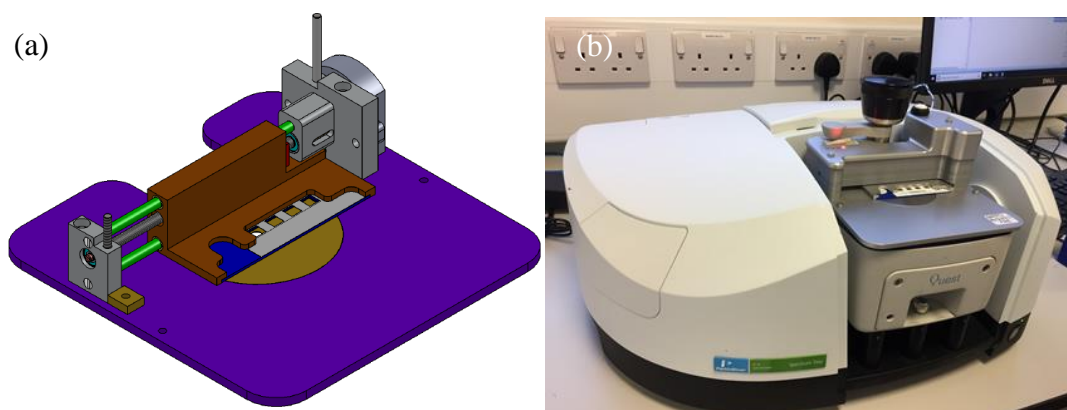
The custom built slide indexing unit intended to be complementary to the Quest ATR universal accessory module (a) as a CAD model showing an assembly of a selection of core components: baseplate (purple), specular reflectance puck (light brown), slide carriage (dark brown), slide shafts (green), mounting blocks, lead screw, and stepper motor (grey). (b) slide indexing unit mounted within the Spectrum2 on top of the Quest ATR unit with a SIRE sample slide inserted into the slide carriage. A 3D printed PLA cover has been added which provides secure housing for the red LEDs and push button.
